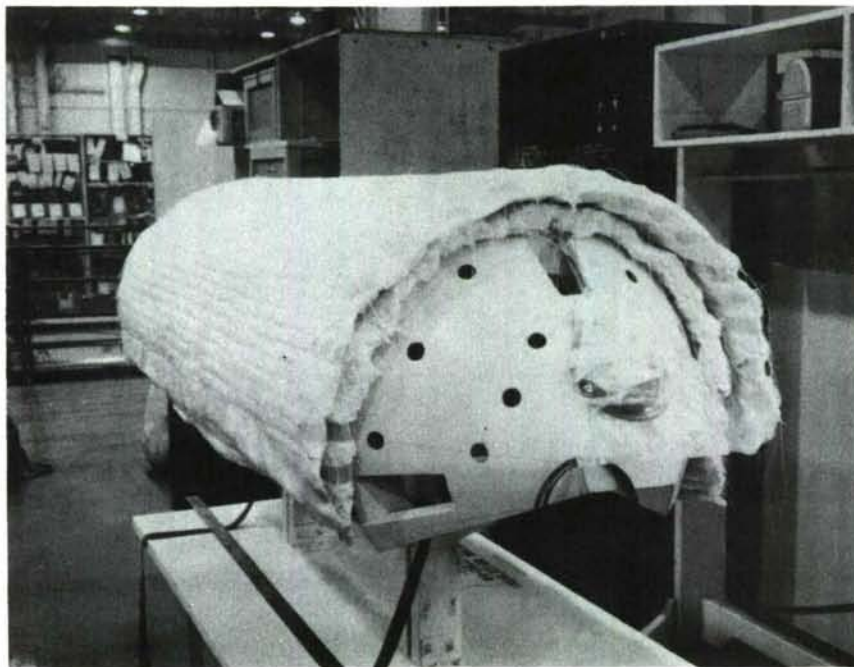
INSULATION BLANKET ASSEMBLY - CYLINDRICAL SECTION
